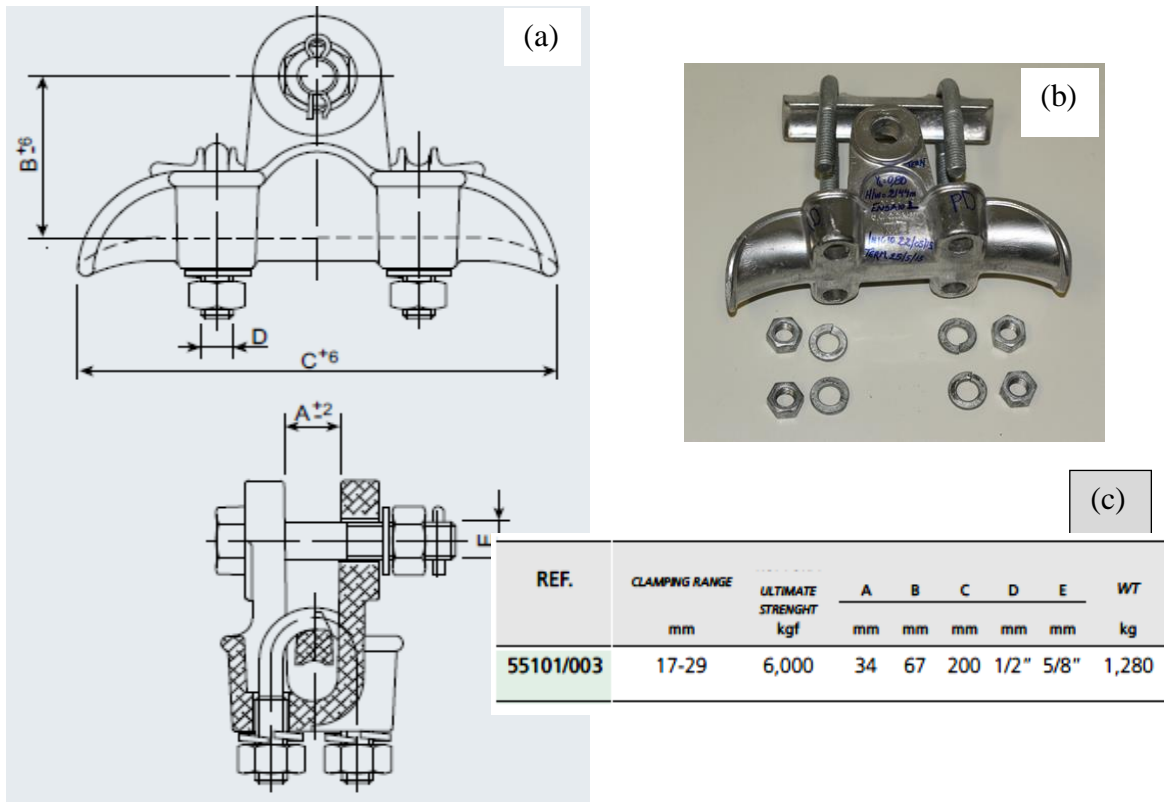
(a) Drawing; (b) assembly of suspension clamp; and (c) dimensions of suspension clamp (Aida, 2010)
